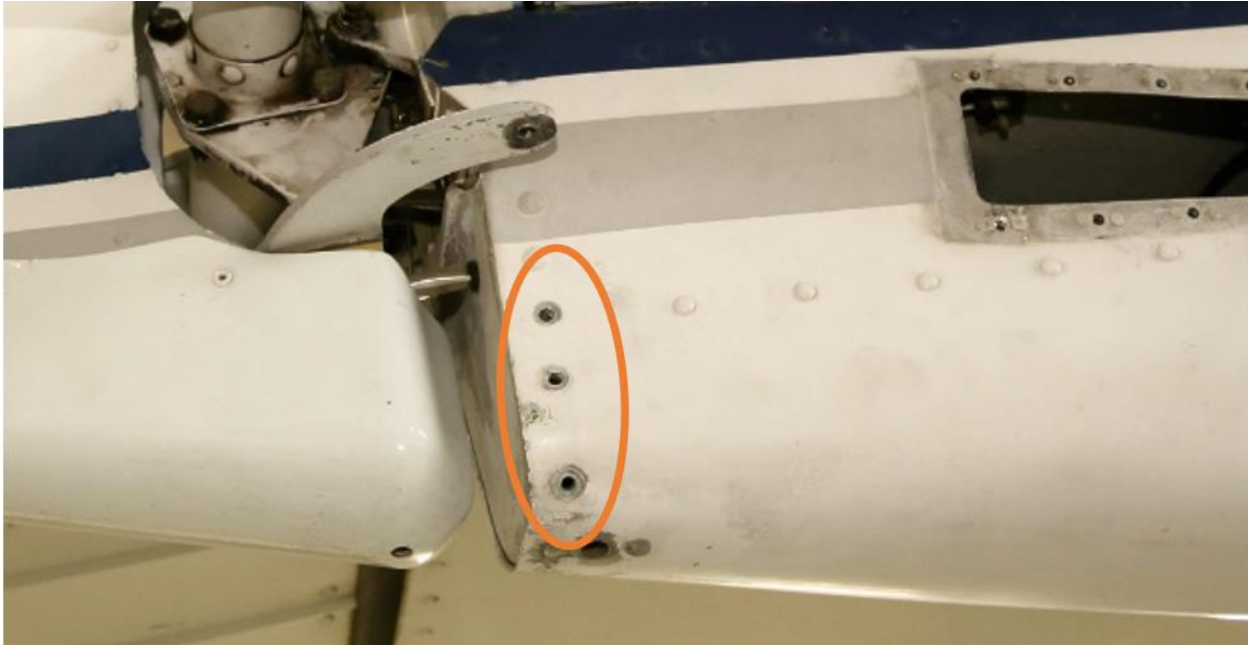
, Aft Bulkhead RH Rivets, Removed
